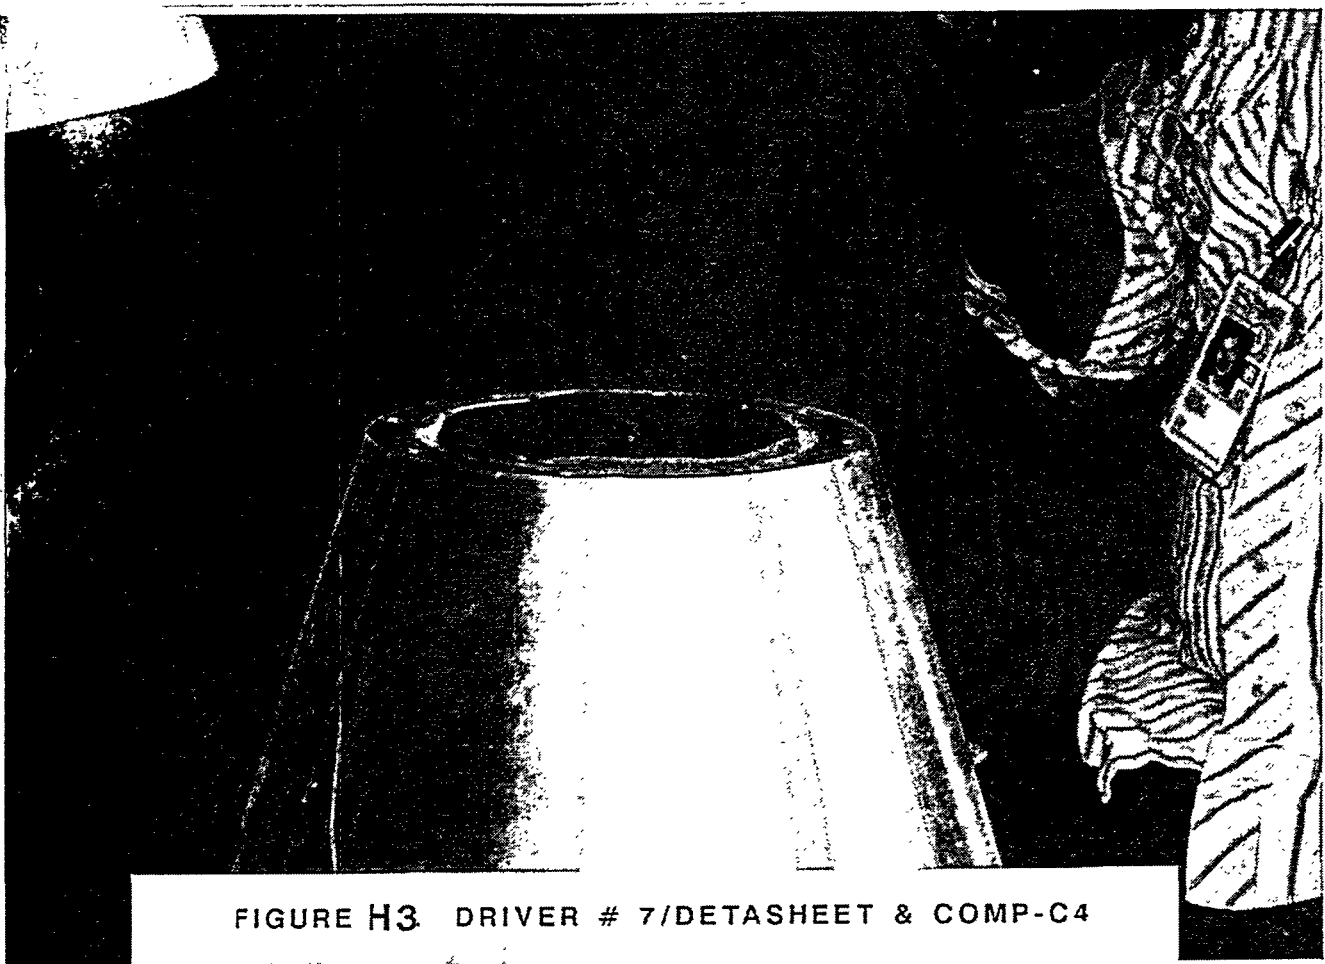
DRIVER # 7/DETASHEET & COMP-C4
